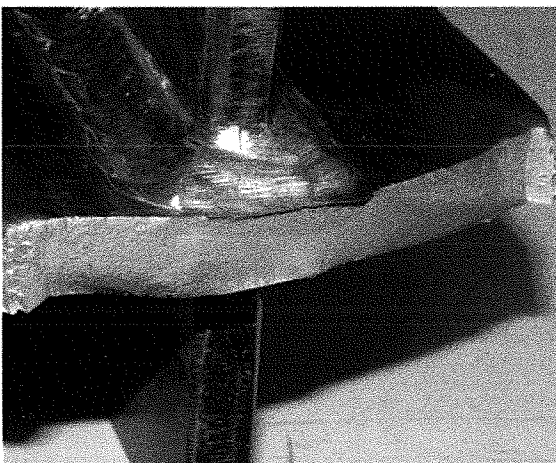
Crack initiation on as-welded joint (weld toe)
